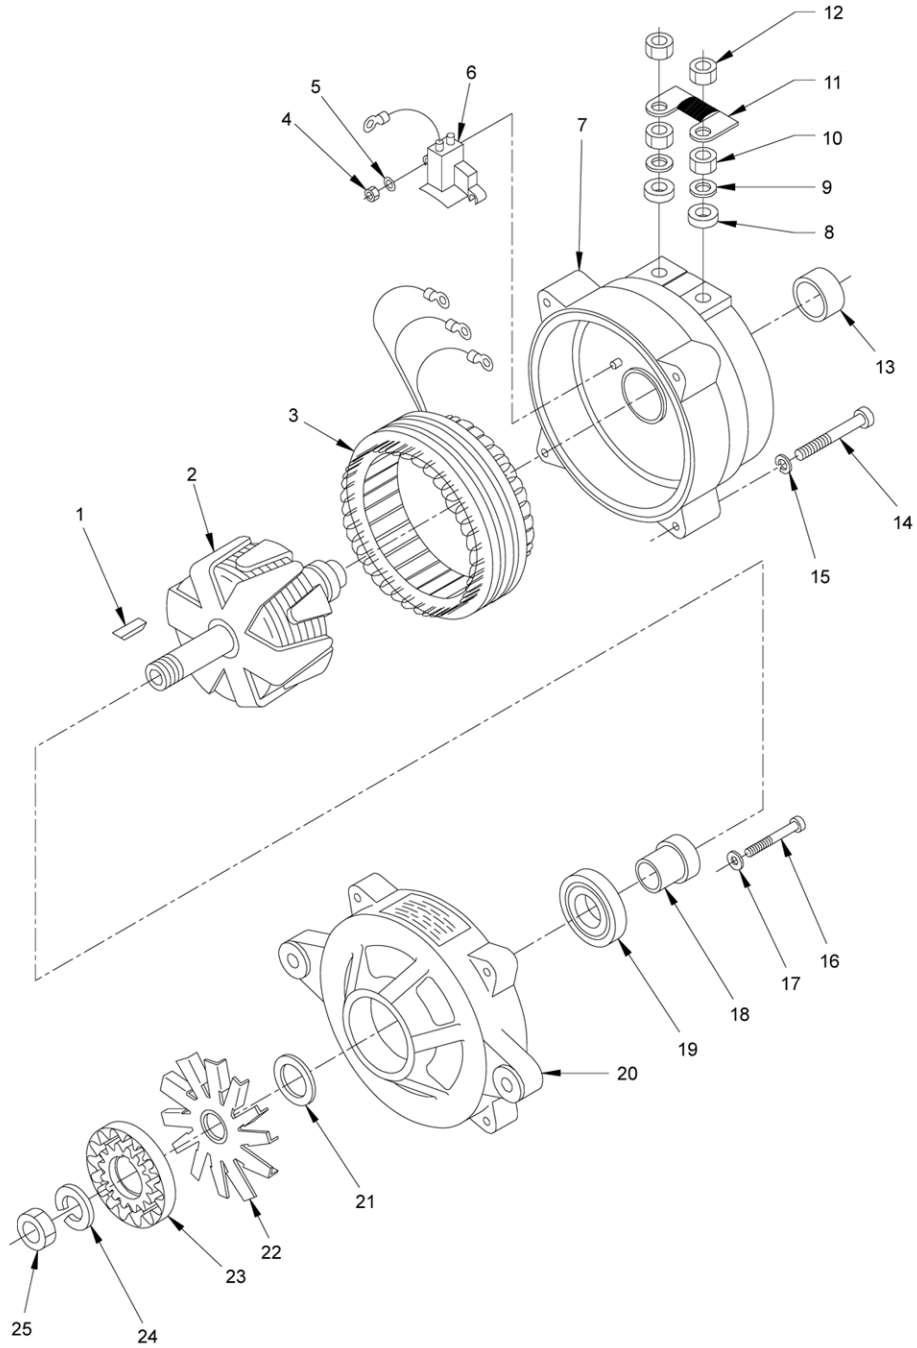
DC Alternator Assembly (MEP-501A) (Sheet 1 of 2).
